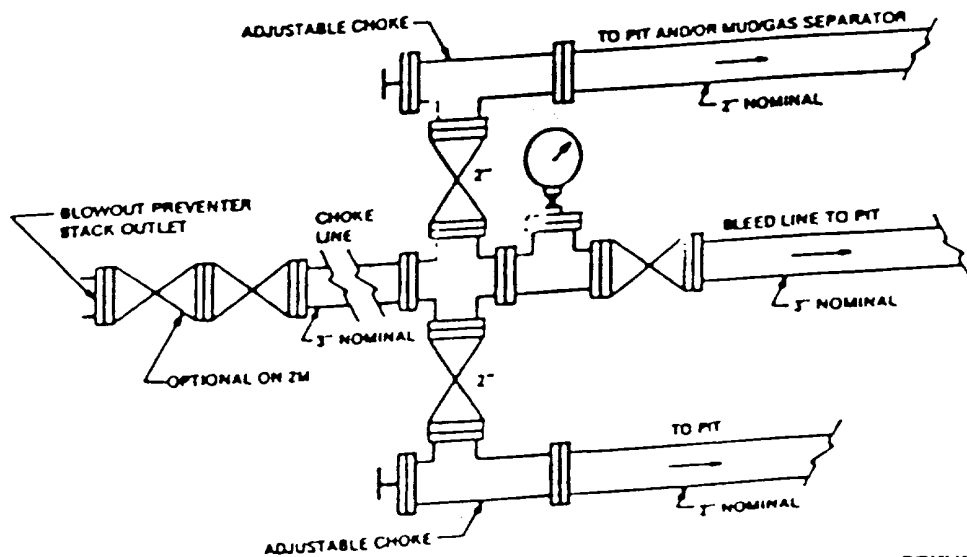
Typical choke manifold assembly for 2M and JM working pressure service — surface installation.
